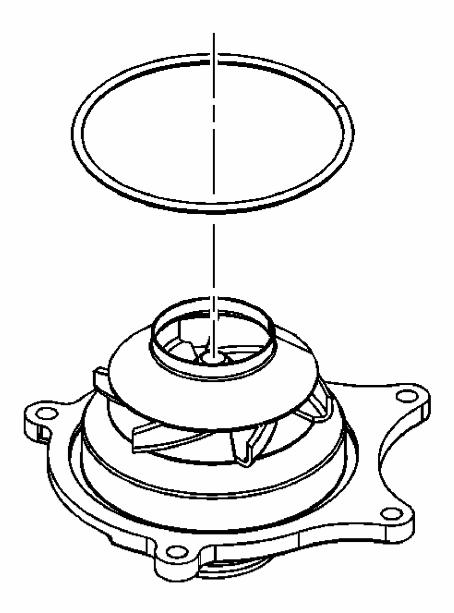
Identifying Water Pump O-Ring Seal Courtesy of GENERAL MOTORS CORP.
